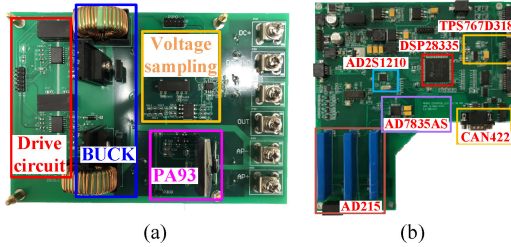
Designed PCB. (a) RTSPSs PCB. (b) Controller PCB based on DSP28335.
